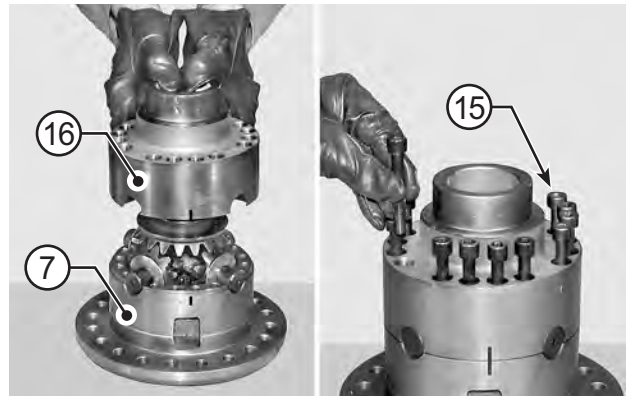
Mount the locking half-box (16) onto the half-box (7) and lock it with screws (15) coated with Loctite 270. Tighten by hand.
